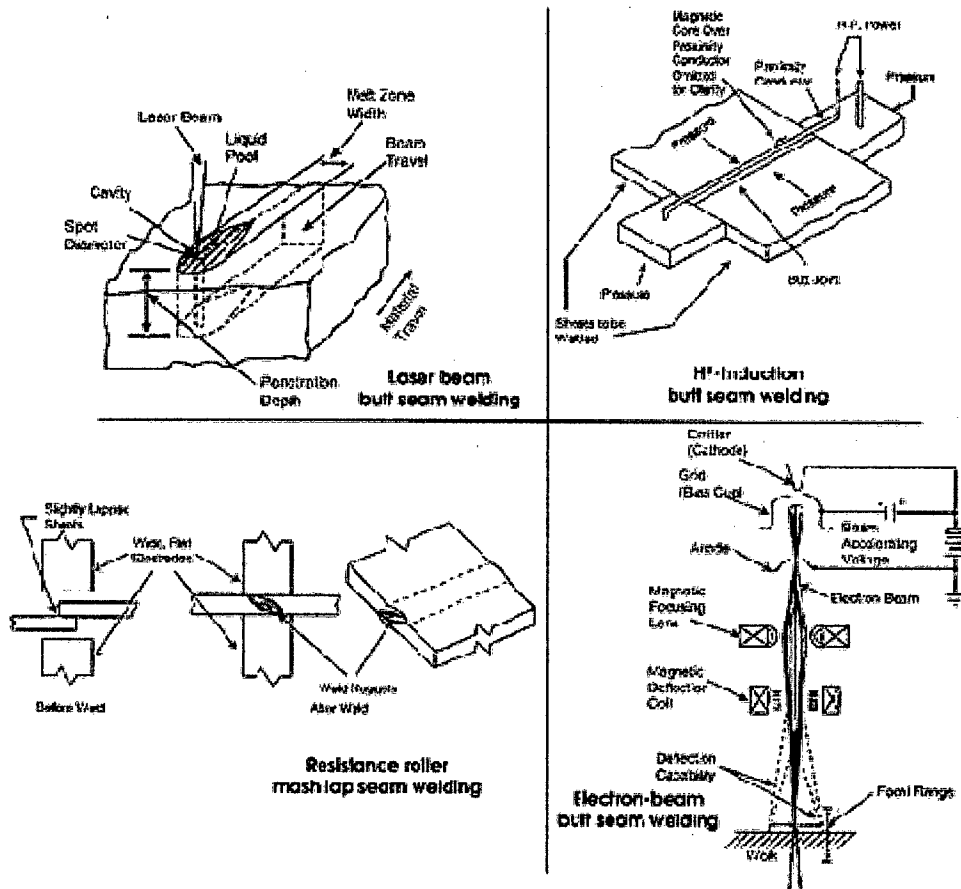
Welding types used for Tailor Welded Blanks (Anon, 1995).
